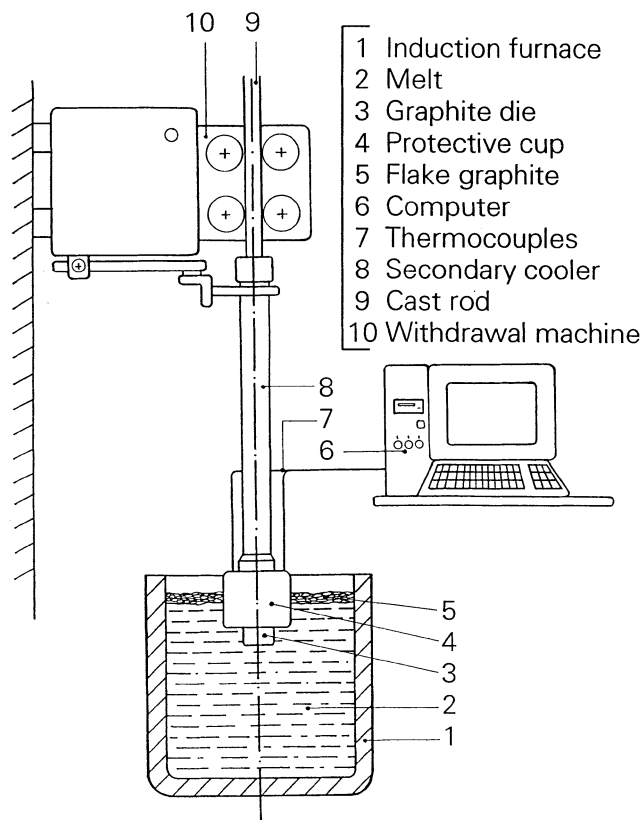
A schematic layout of the upcasting machine used in the experiments.
